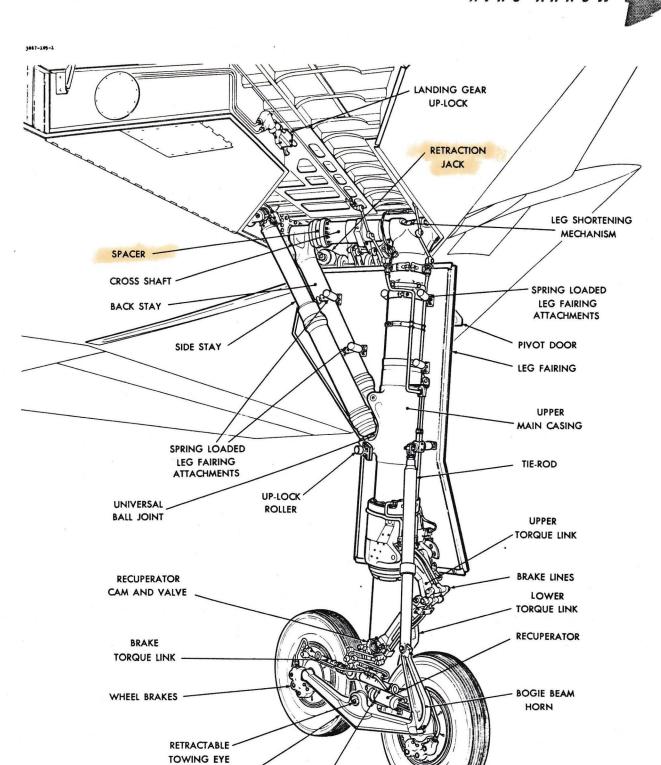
LEFT-HAND MAIN LANDING GEAR ASSEMBLY
